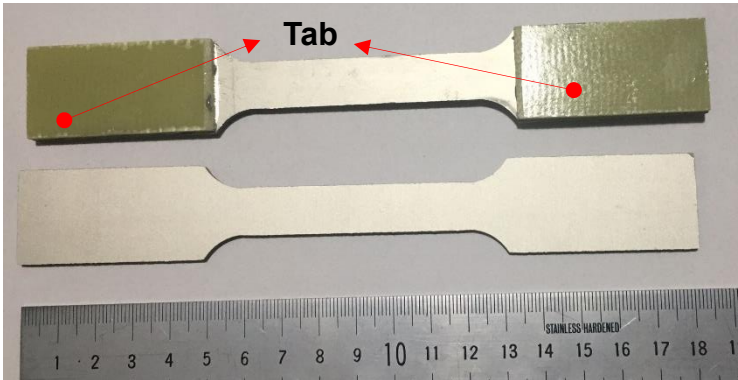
Tensile test specimen cut by waterjet and tab bonding process
